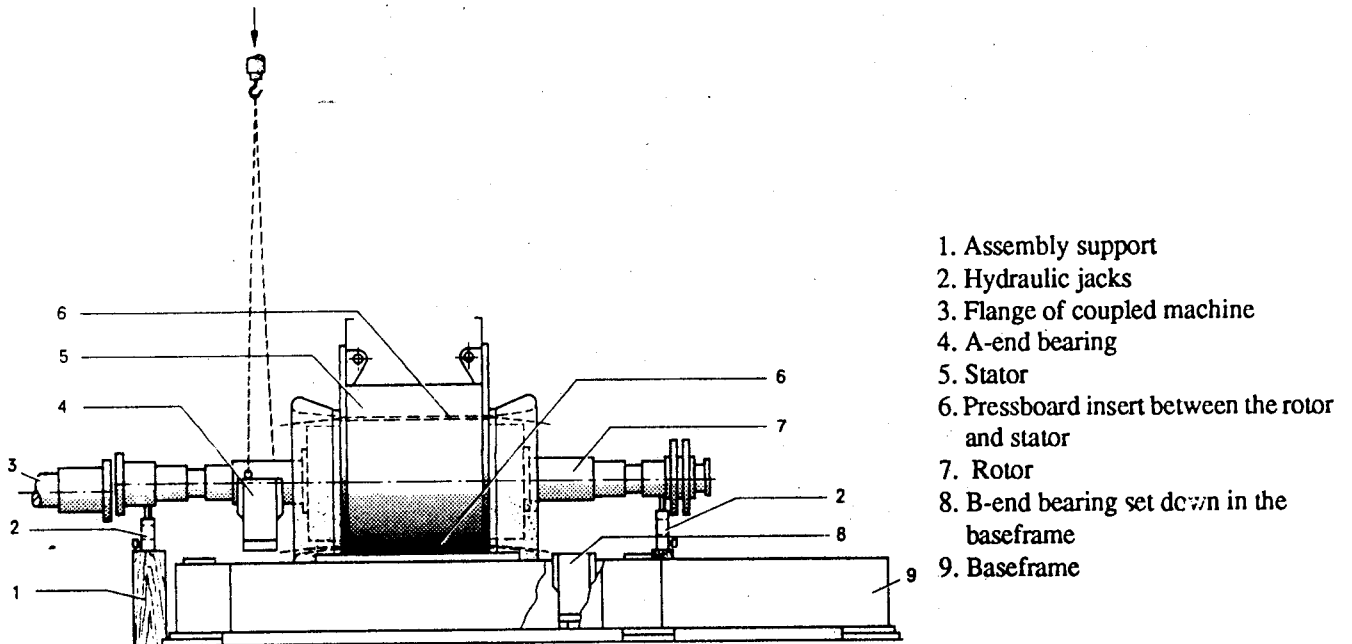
Rotor with hydraulic jacks raised. Dismantling the bearings
